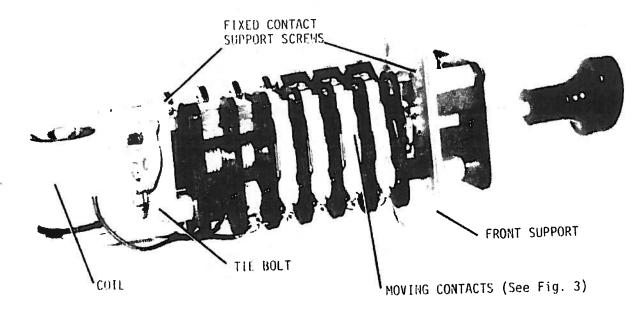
(8031895) Six Contact HEA61 Relay in Tripped Position, with Cover Removed
